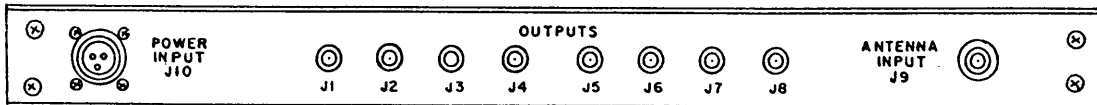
ASSEMBLY LINE DRAWING, REAR VIEW
